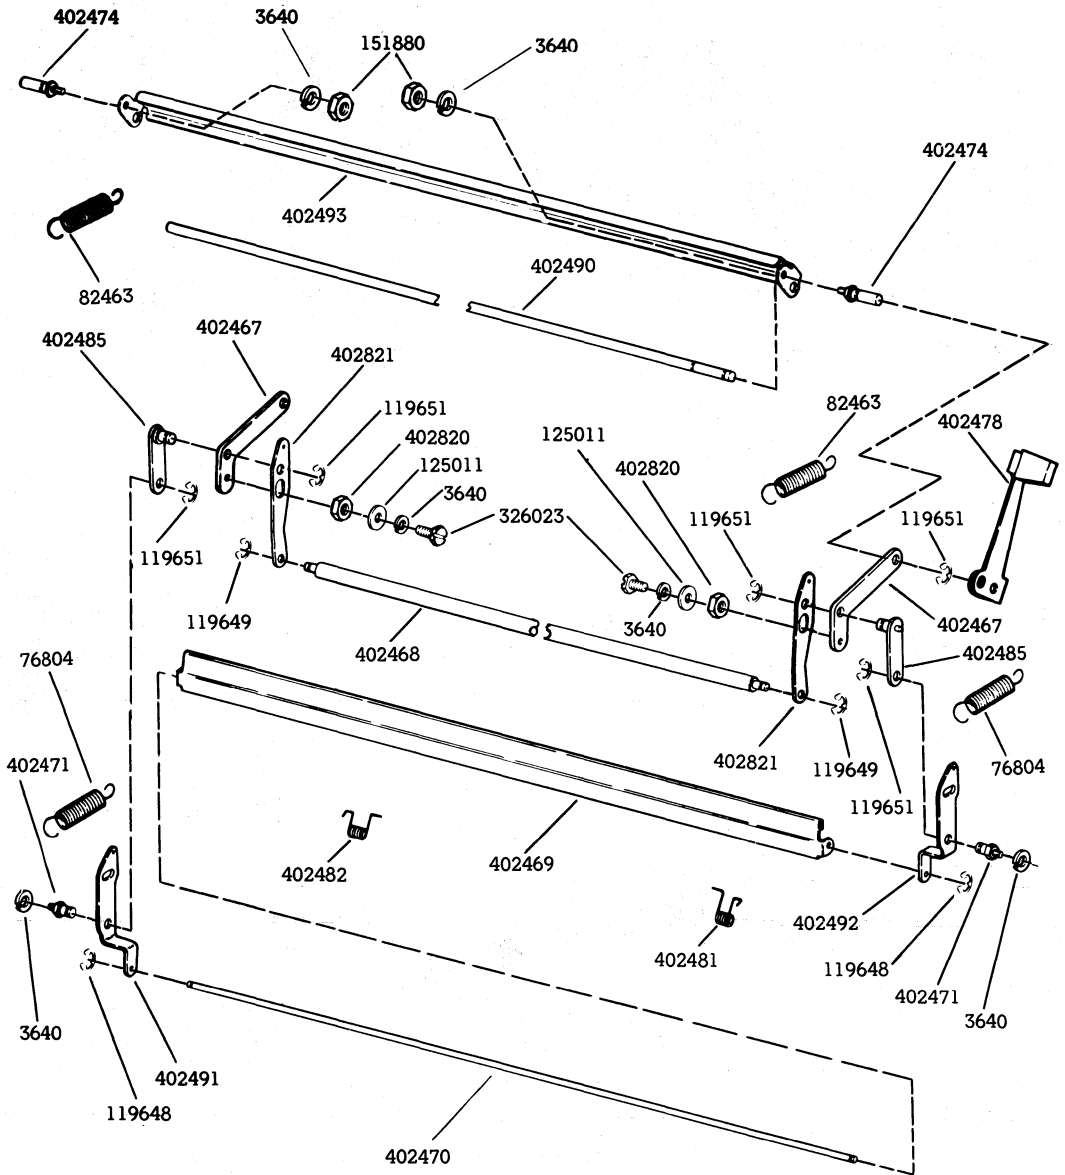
402460 Paper Handling Assembly (Tractor Feed - 80-Column) (Cont.)
